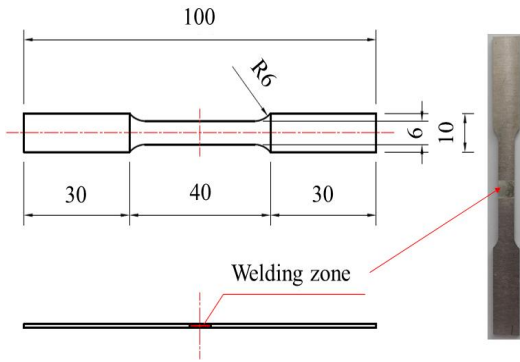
Drawing and actual photo of specimen for UTM(Ultra tensile-strength measurement) test
